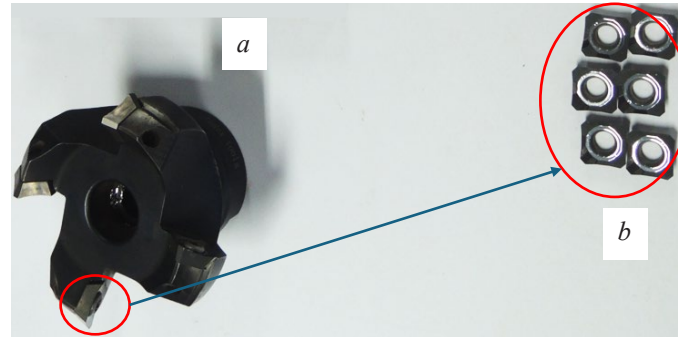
Milling holder and inserts: *a* – milling holder; *b* – inserts
